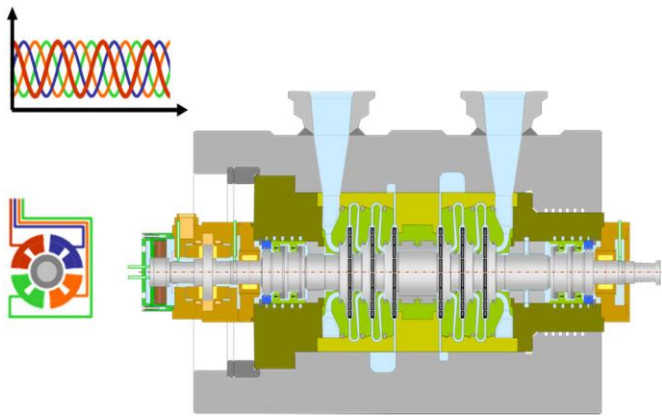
Representation of a compressor with the magnetic bearing attached to the non-drive end.
